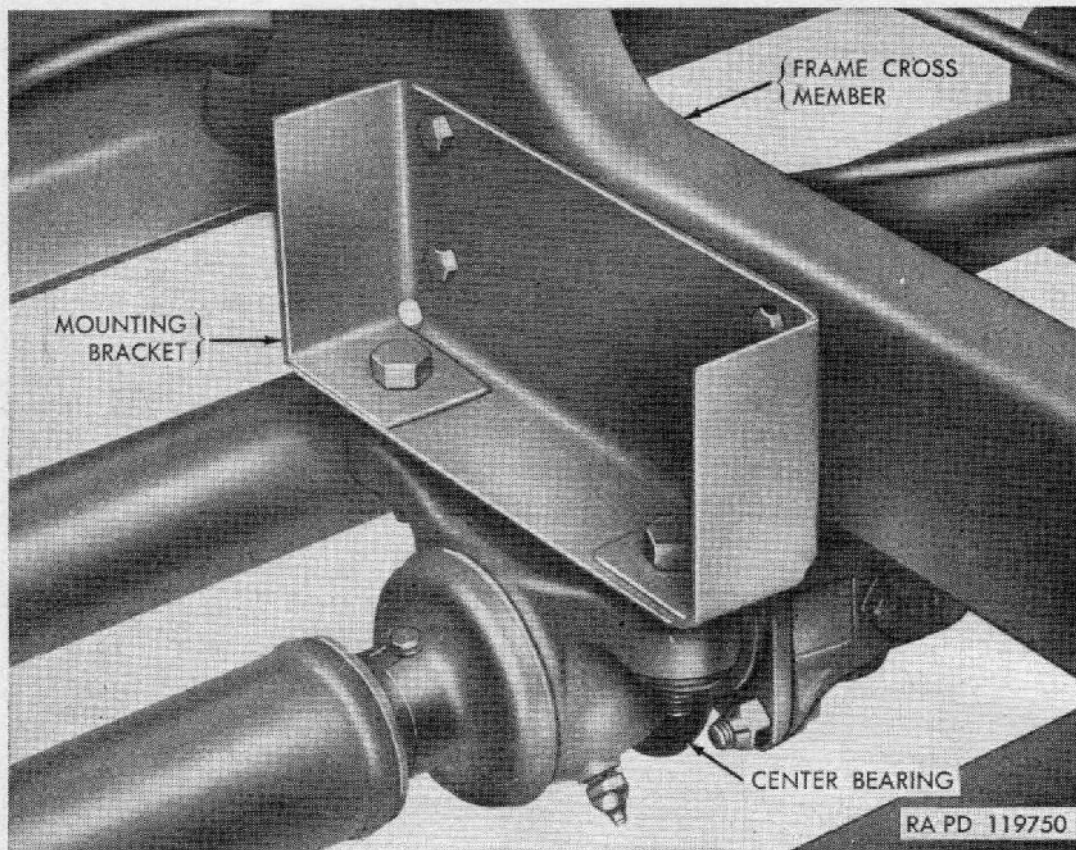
Center bearing—forward rear axle propeller shaft—M36.
